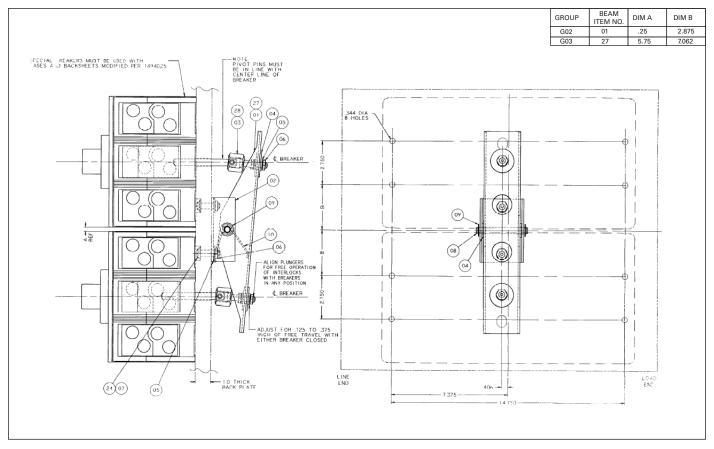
Walking Beam Plunger Adjustment om 3-Pole PD5-Frame Circuit Breaker.
